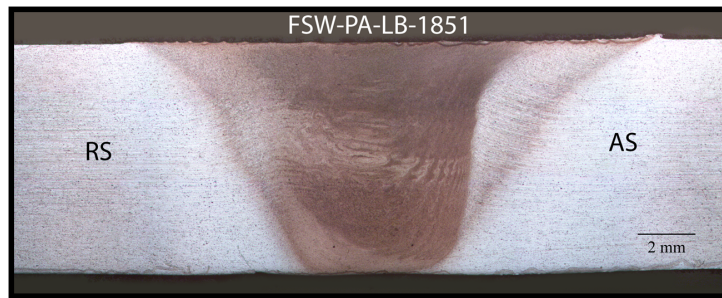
Macrograph of the weld FSW-PA-LB-1851 (5 mm/s; 700 rpm).
